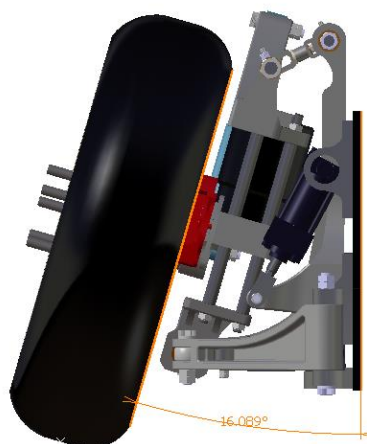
Side view of the corner module with maximum camber at zero steering.
